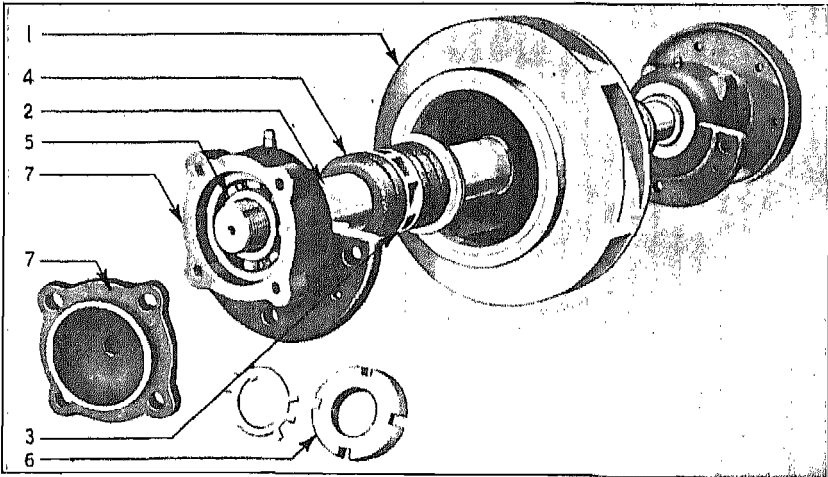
Impeller and shaft assembly of pumps showing: (1) enclosed impeller; (2) ground carbon-steel shaft; (3) water seal ring; (4) packing; (5) standard ball bearing; (6) lock nut; and (7) ball-bearing housing and cover. (Courtesy Fairbanks-Morse Company.)
